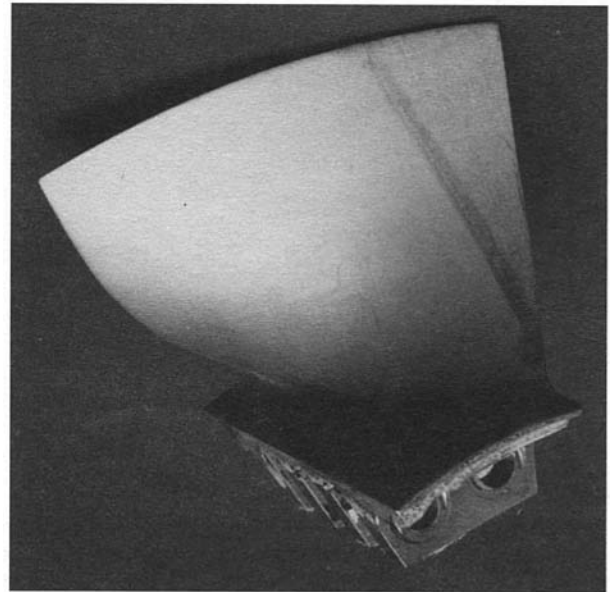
EB welded repaired blade fully machined and re-contoured: EB weld seam can be seen due to macroetching
